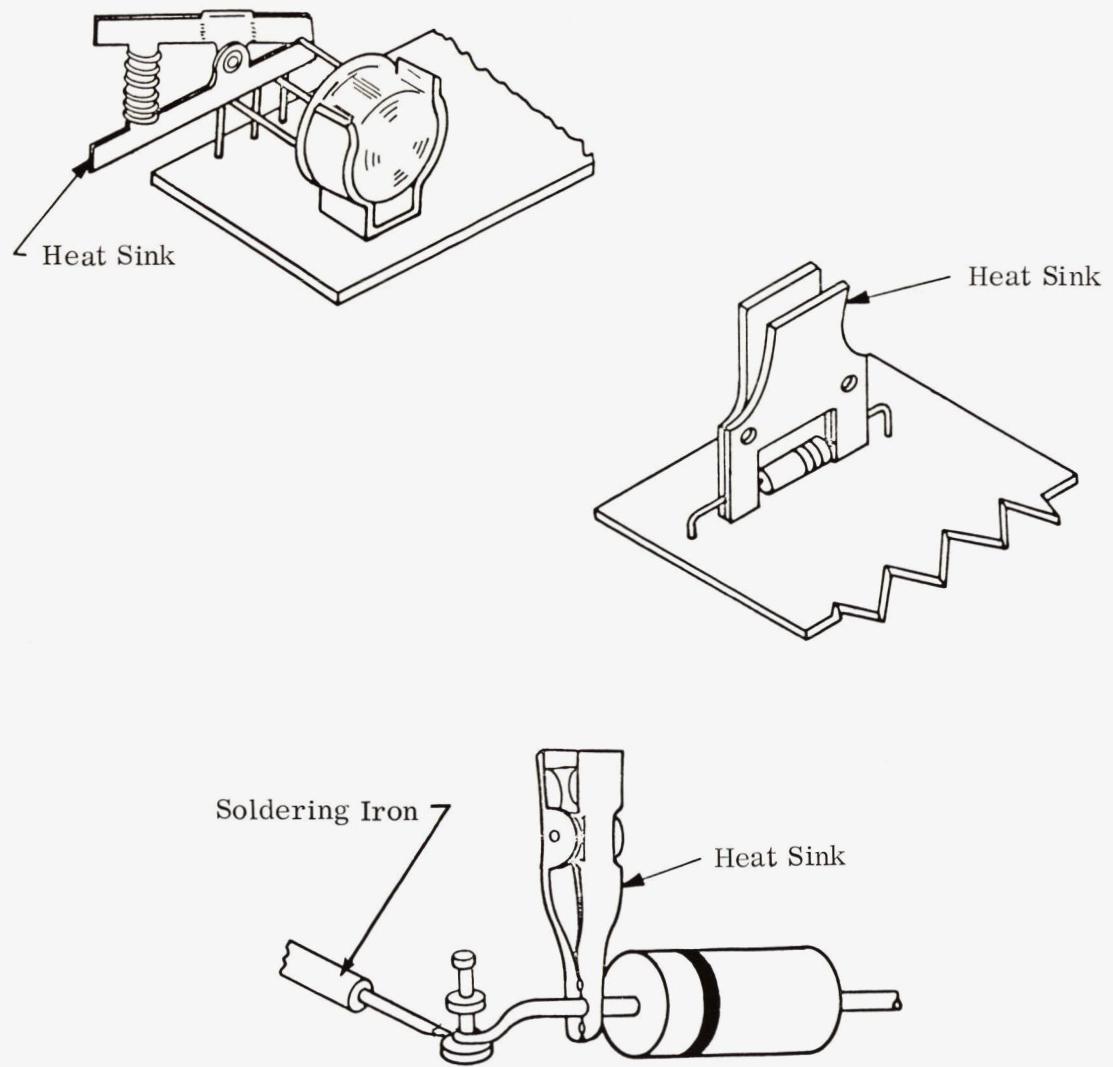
Proper Techniques for Soldering Component Leads Using a Heat Sink
